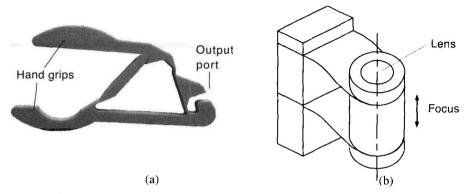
Examples of compliant mechanisms: (a) crimping mechanism (from [3]), and (b) parallel-guiding mechanism.
